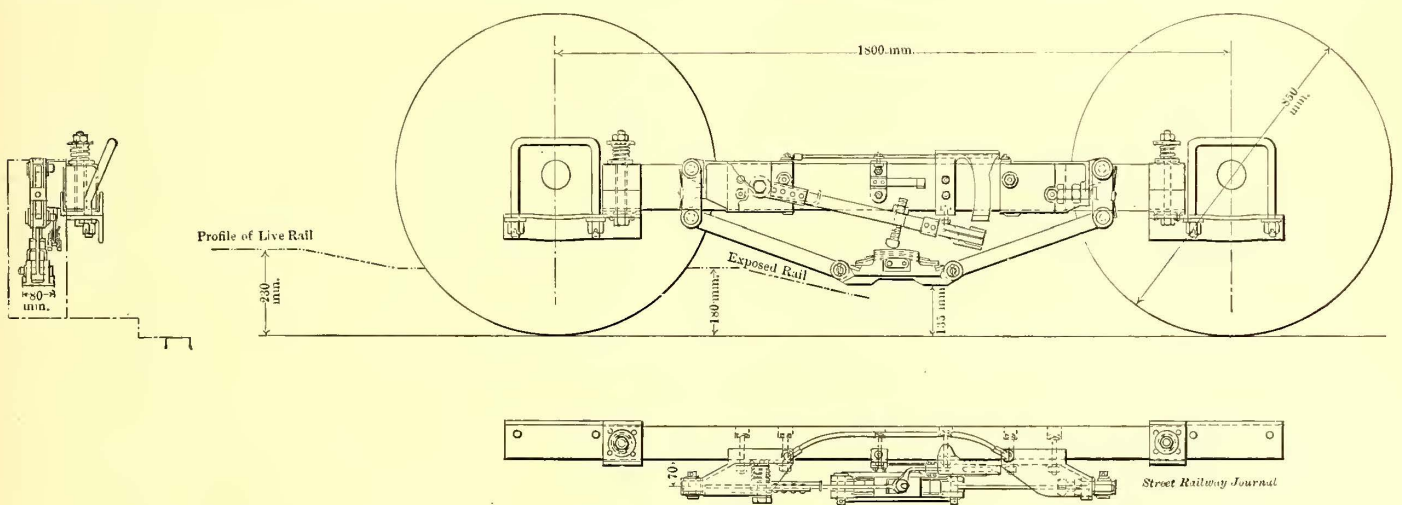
DETAILS OF CONSTRUCTION OF BOSTON ELEVATED CONTACT SHOE
